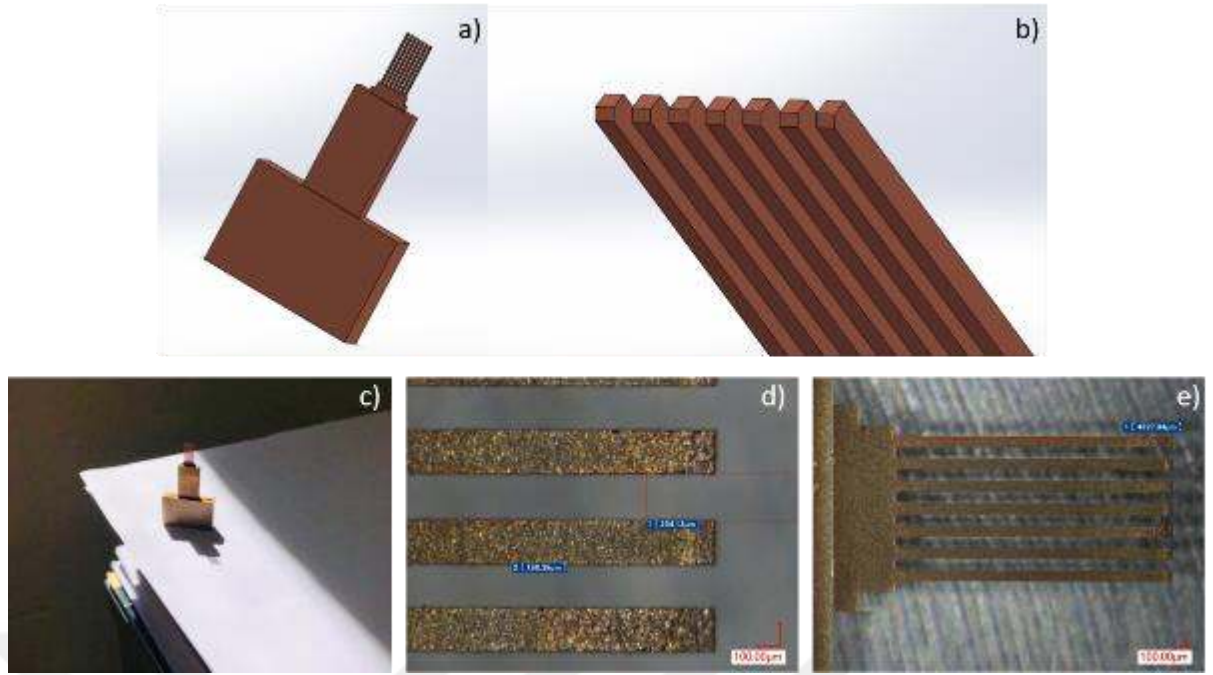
a,b) Probe Design-1 schematic view from SolidWorks, c,d,e) The picture of manufactured probe design-1
